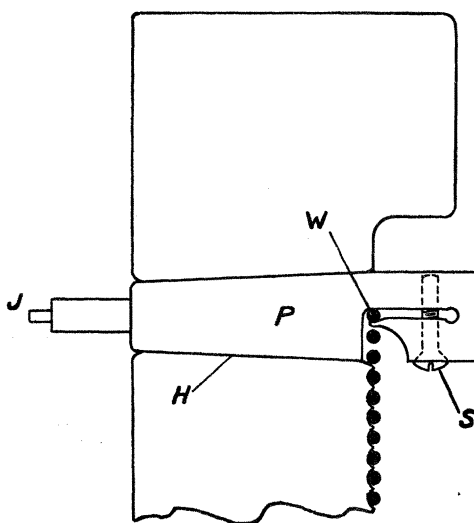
Pin and clamp for gripping the beginnings and ends of windings.
